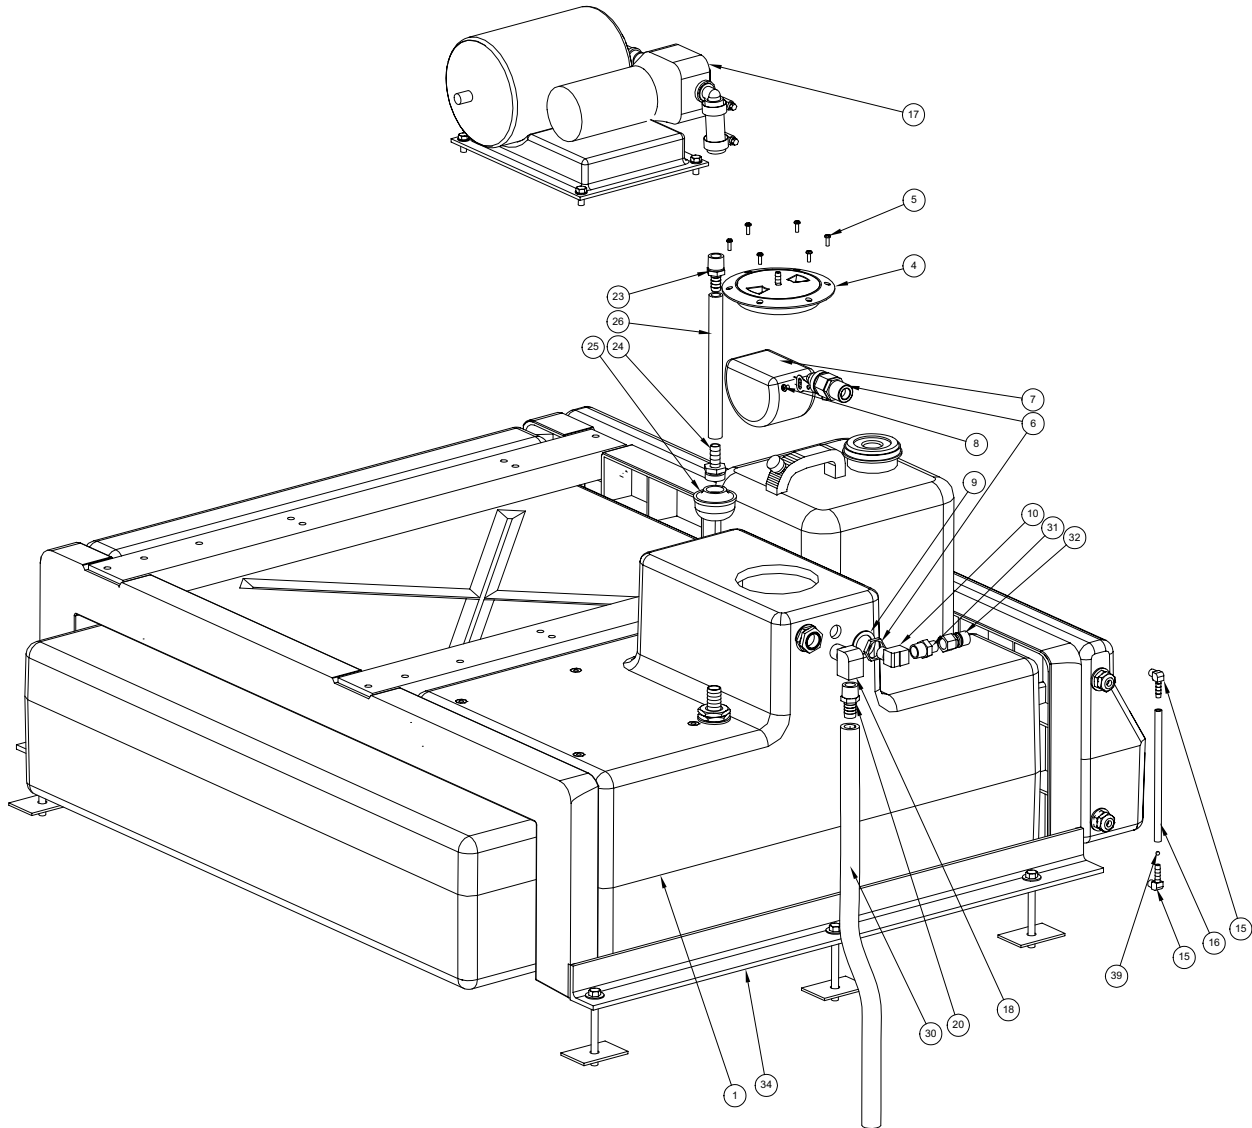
85 Gallon Rotomolded Tank Assembly - Rear View
